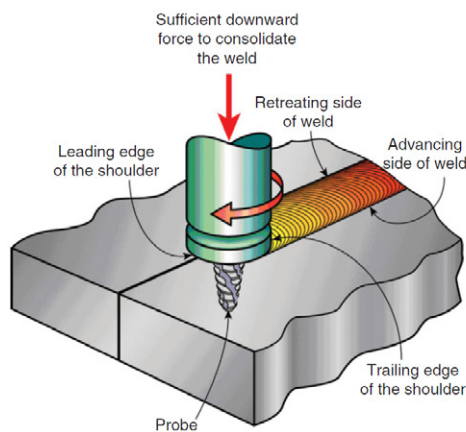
Single-sided stir friction welding site. Image courtesy of TWI.
